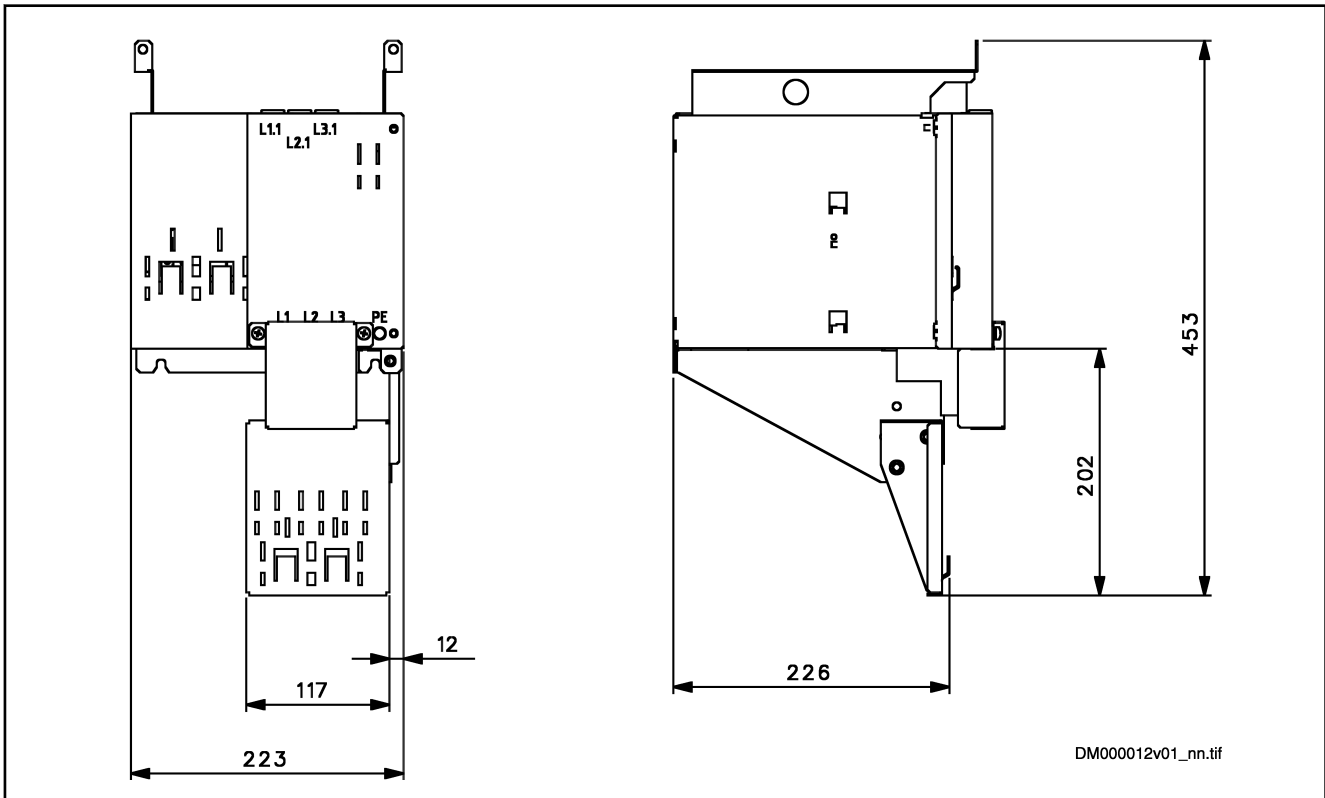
Mains filter dimensions HNK01.1A-A075-E0080/0106 with HAS02
